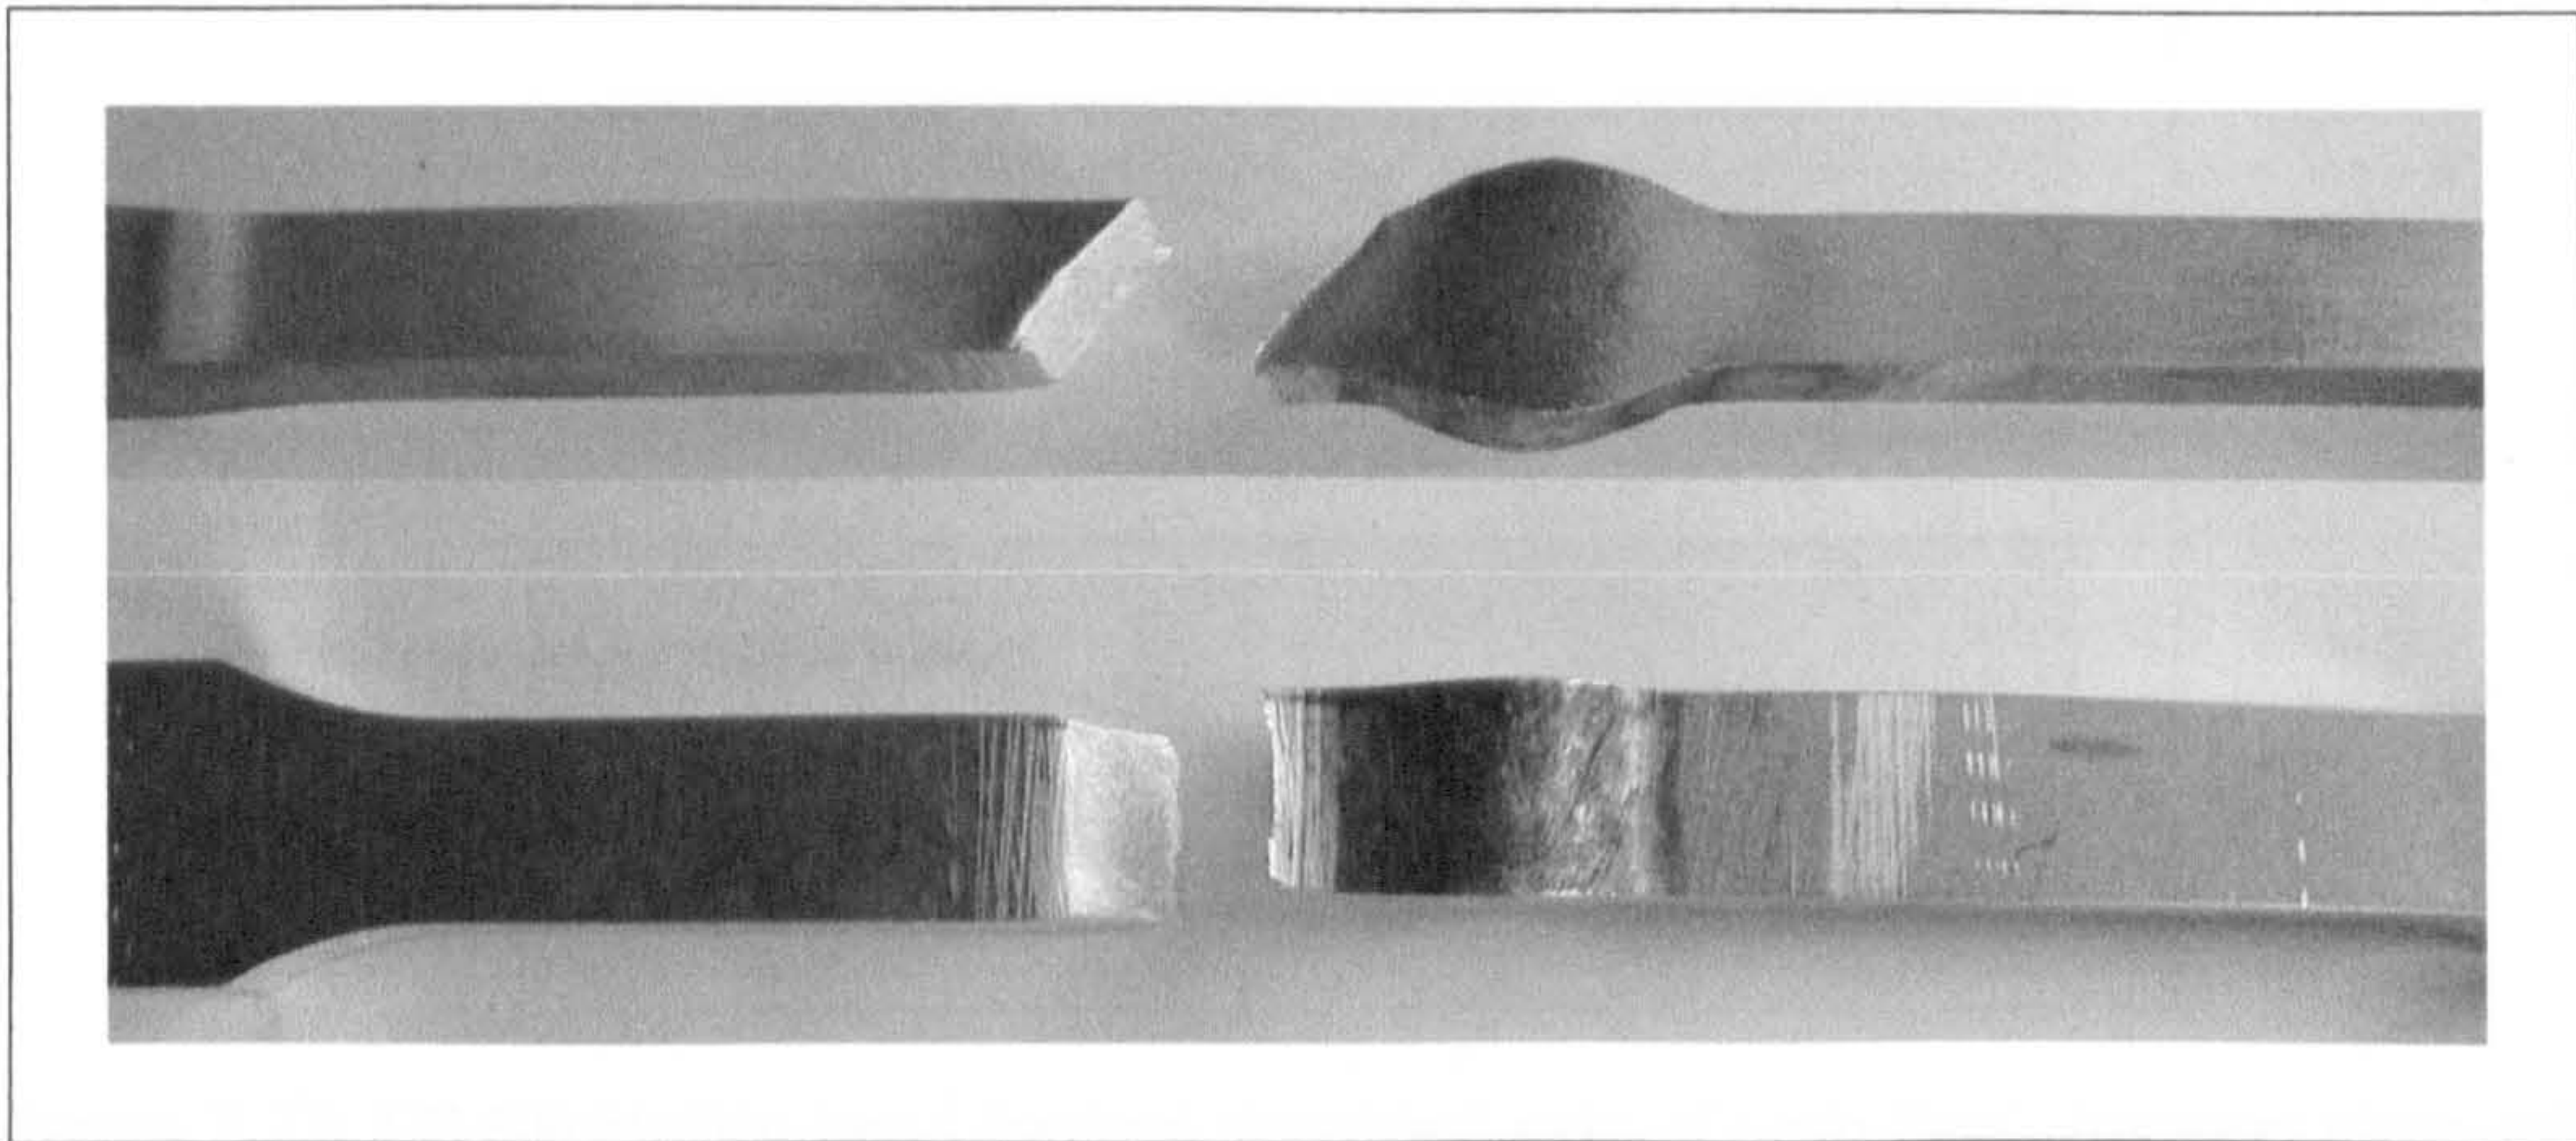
Shear failure from monotonic uniaxial tensile testing of a MIG HI welded AA 5383-H321.
